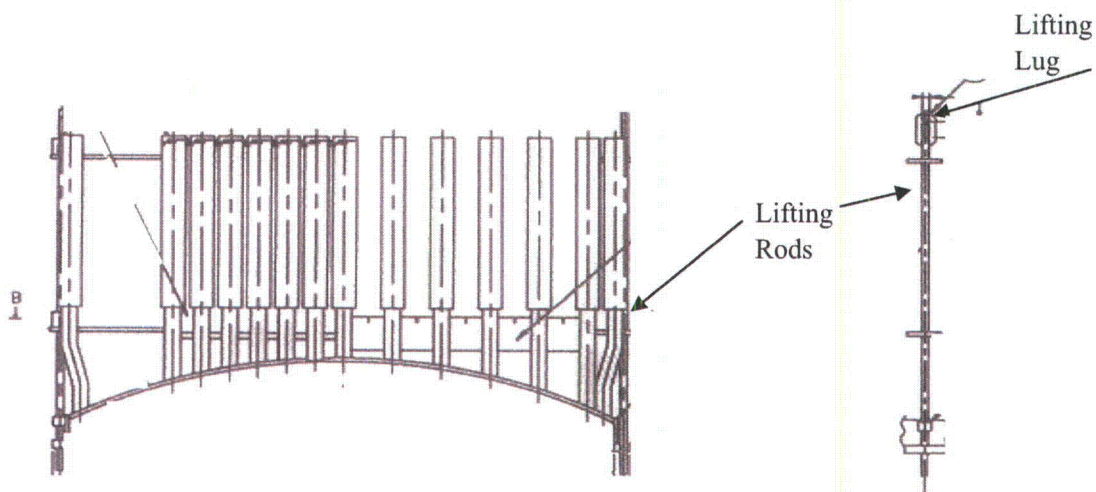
Shroud Head Lifting Rods/Lugs
